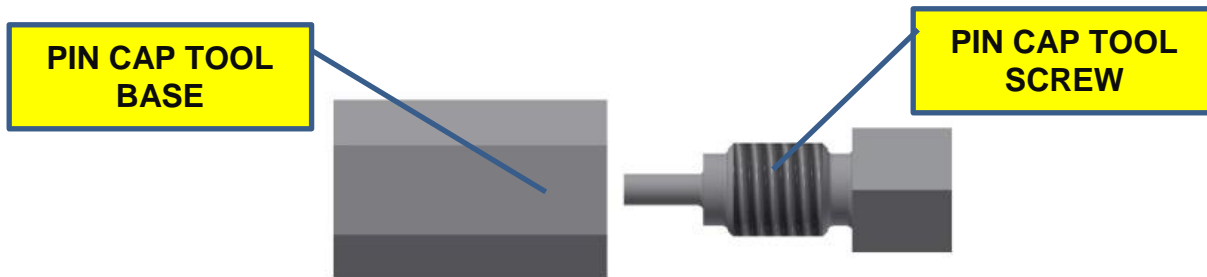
The pin cap tool is used to push the tapered brass pin into the pin receiver, wedging the trigger wire into place.
